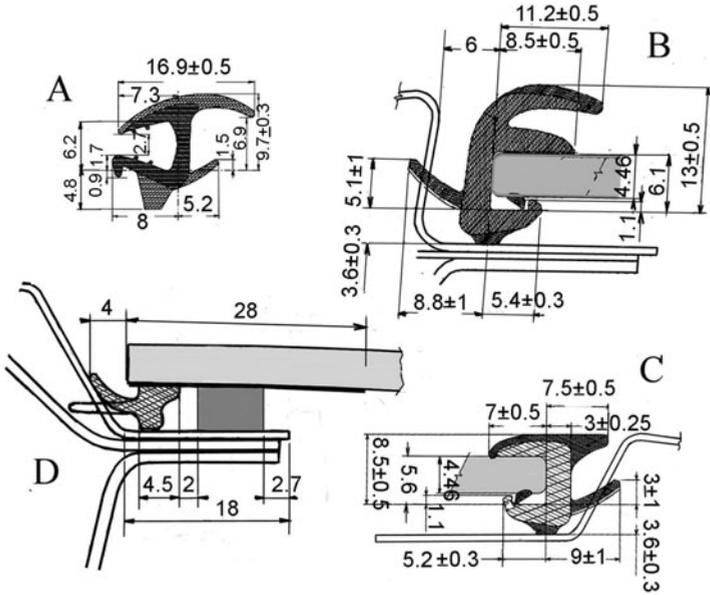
Examples of different windshield encapsulations: A) wrap-over, co-molded; B) built-in, compact rubber; C) built-in, co-molded; D) extruded, frameless.
